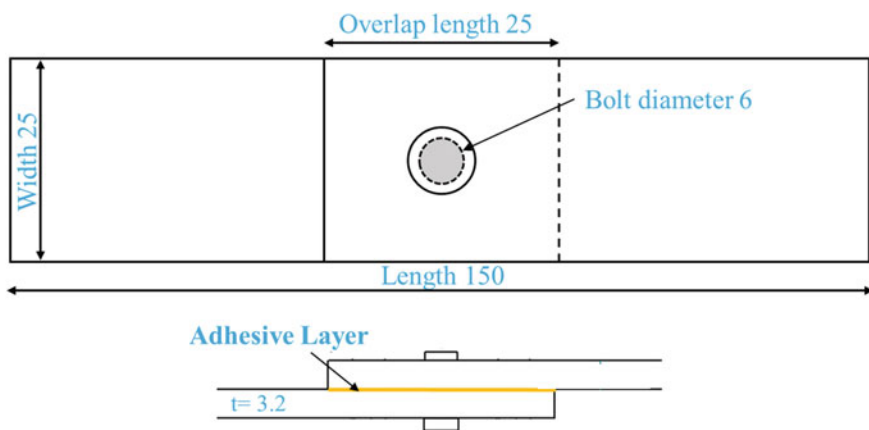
The dimensions of the hybrid joint specimen (*Note: All dimensions are in mm*)
